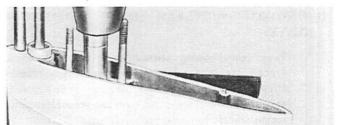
Removing Drive Shaft Needle Bearing from Gear Housing
